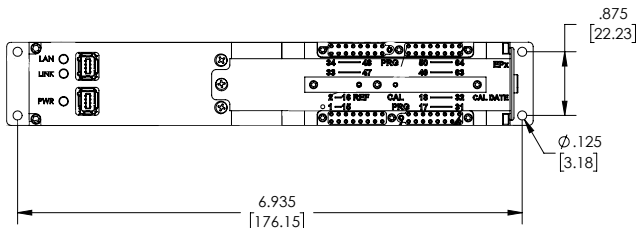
MOUNTING PLATE DIMENSIONS - EPX
